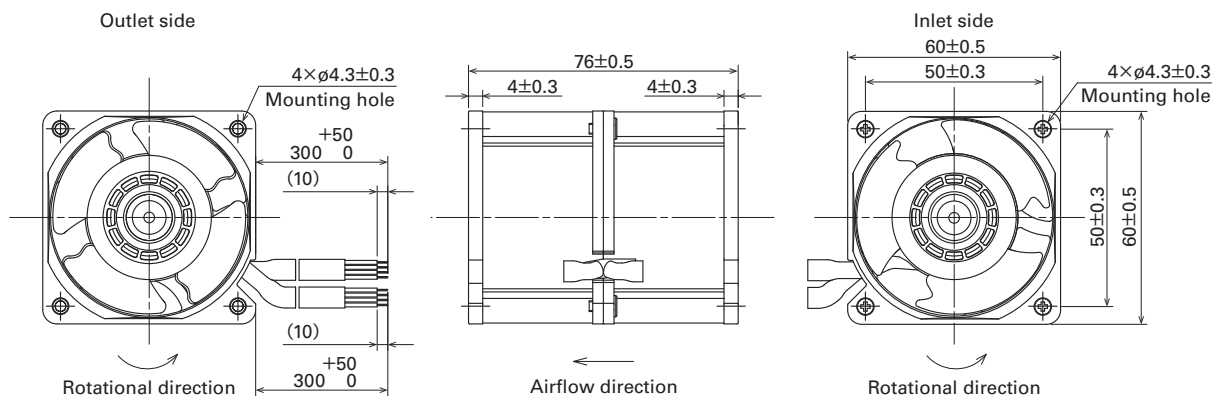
Dimensions of 60 × 60 × 76 mm *San Ace 60L 9CRLB* type (Unit: mm)
